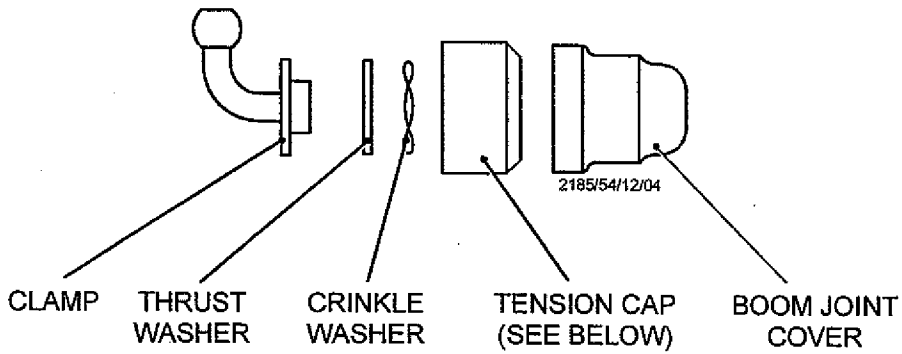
Boom microphone assembly 5965-99-000-5983: friction tension assembly
